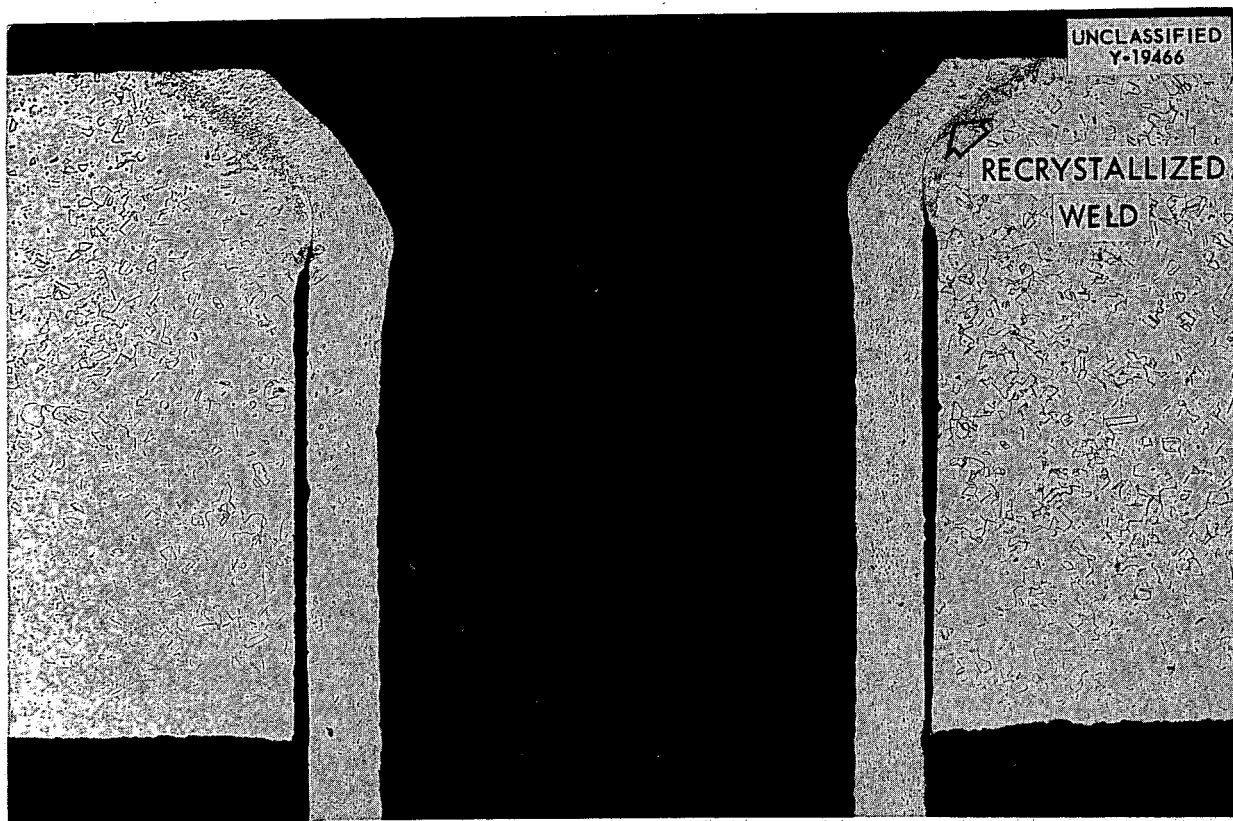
As-received Tube-to-Header Joint Welded by the "Flange-During-Welding Method." The recrystallization weld and worked portion of the tube can be seen at the top of the header plate. Etchant: glyceria regia. 15X.
